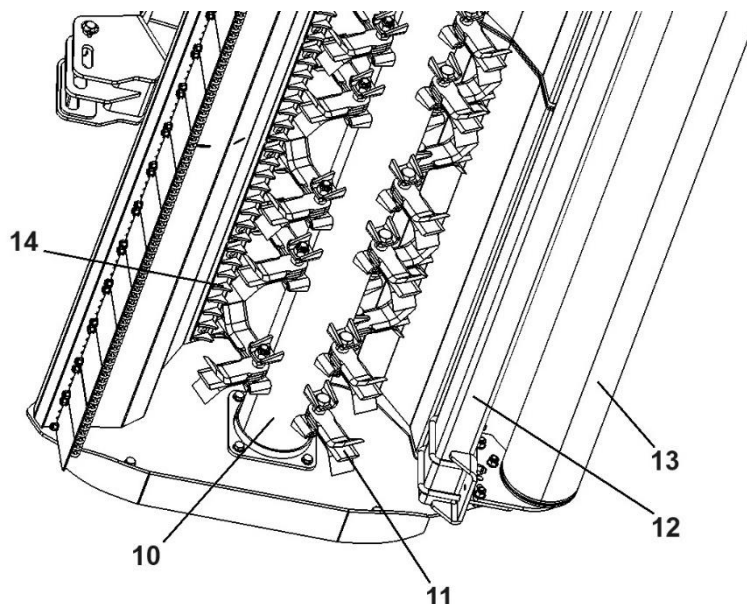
Flail mower – general construction: 10 – working shaft, 11 – cutting blade set, 12 – rear beam of the mower, 13 – following roller, 14 – counter-cutting bar with blades
